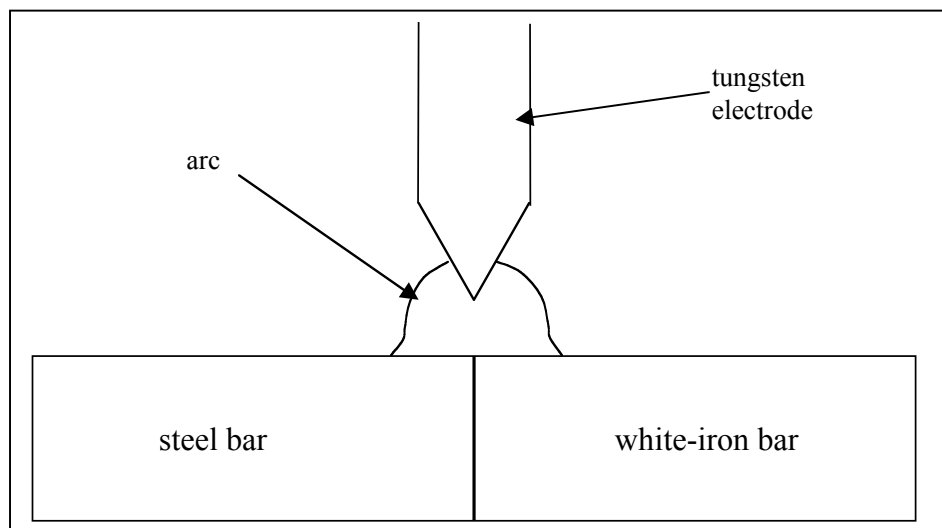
Schematic representation of the GTAW welding experiments.
